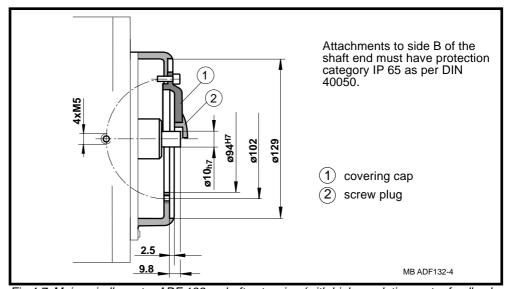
Main spindle motor ADF 132 - shaft extension (with high-resolution motor feedback, type 3 only)
